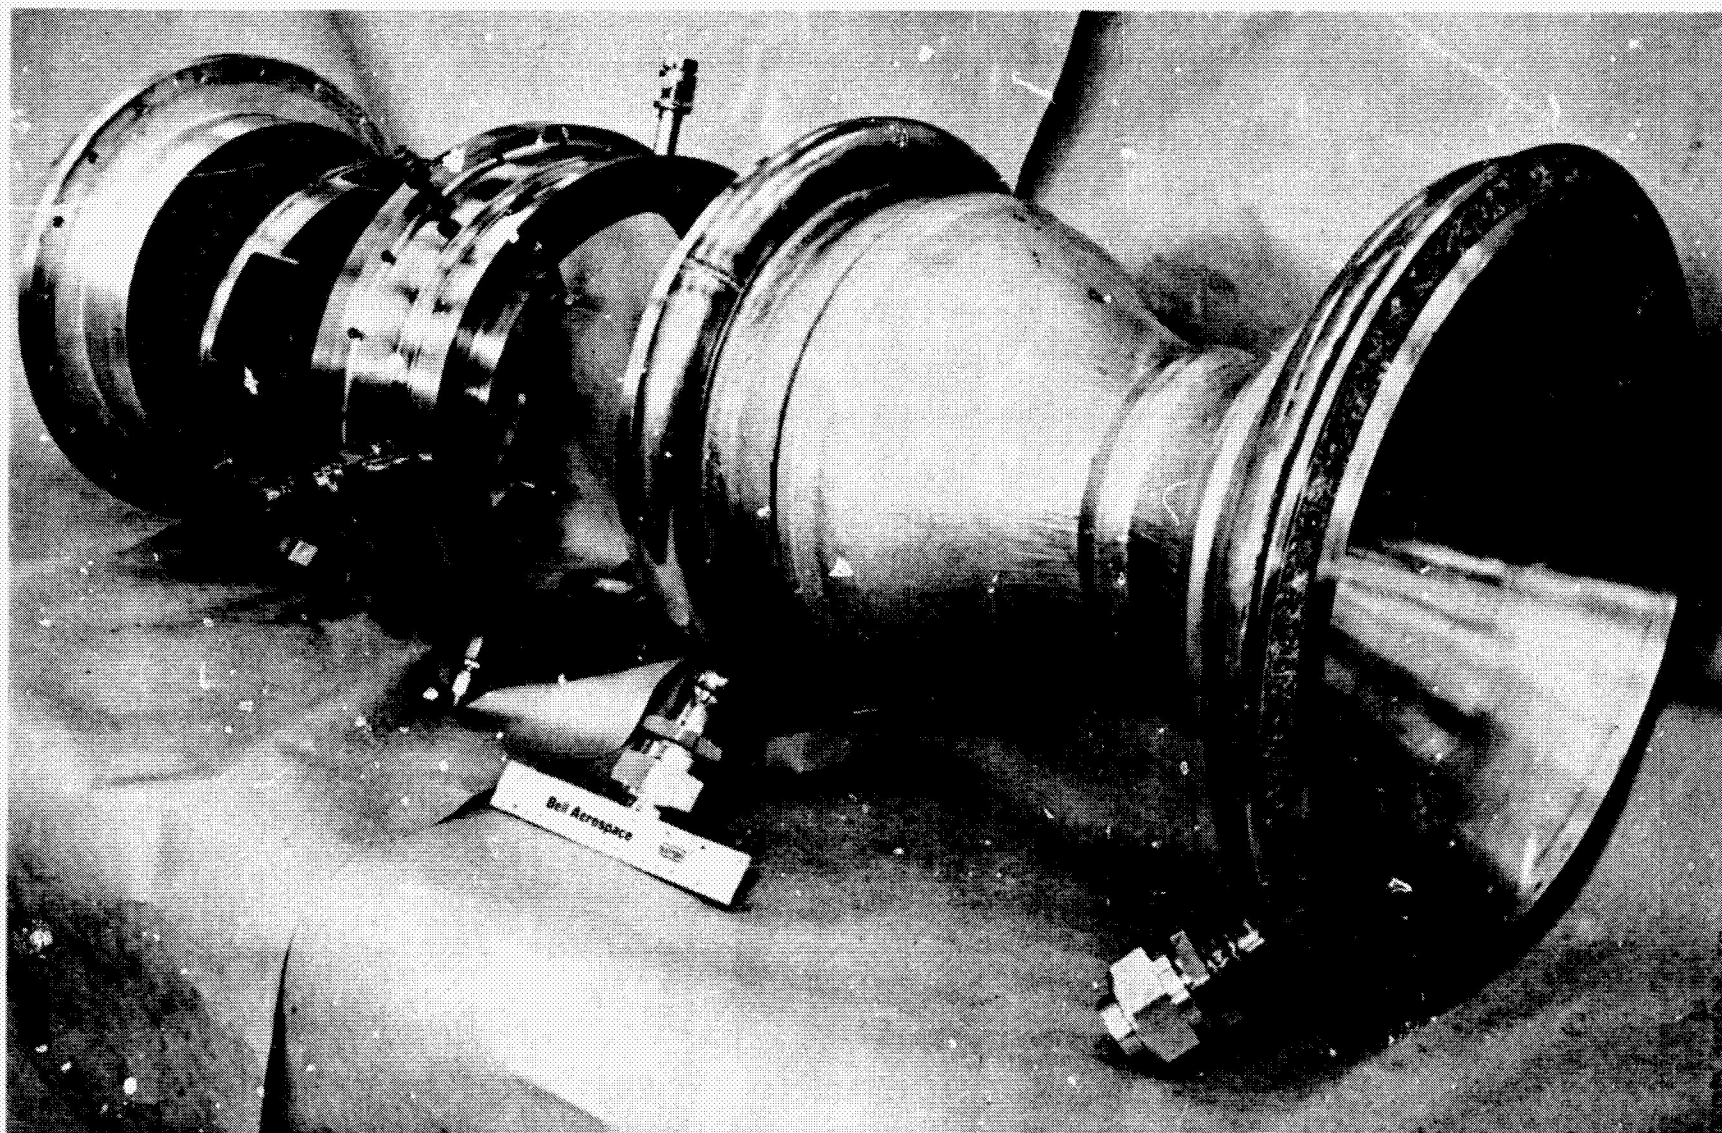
THRUST CHAMBER ASSEMBLY EXPLODED VIEW
